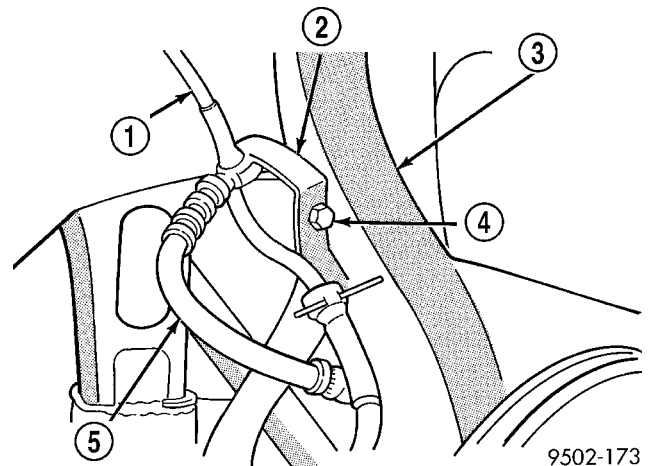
Wheel Speed Sensor Cable Routing Bracket
